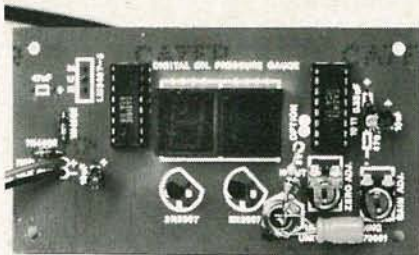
THE COMPLETED oil-pressure gauge board. This version has been modified to incorporate noise reduction (see Fig. 7).
